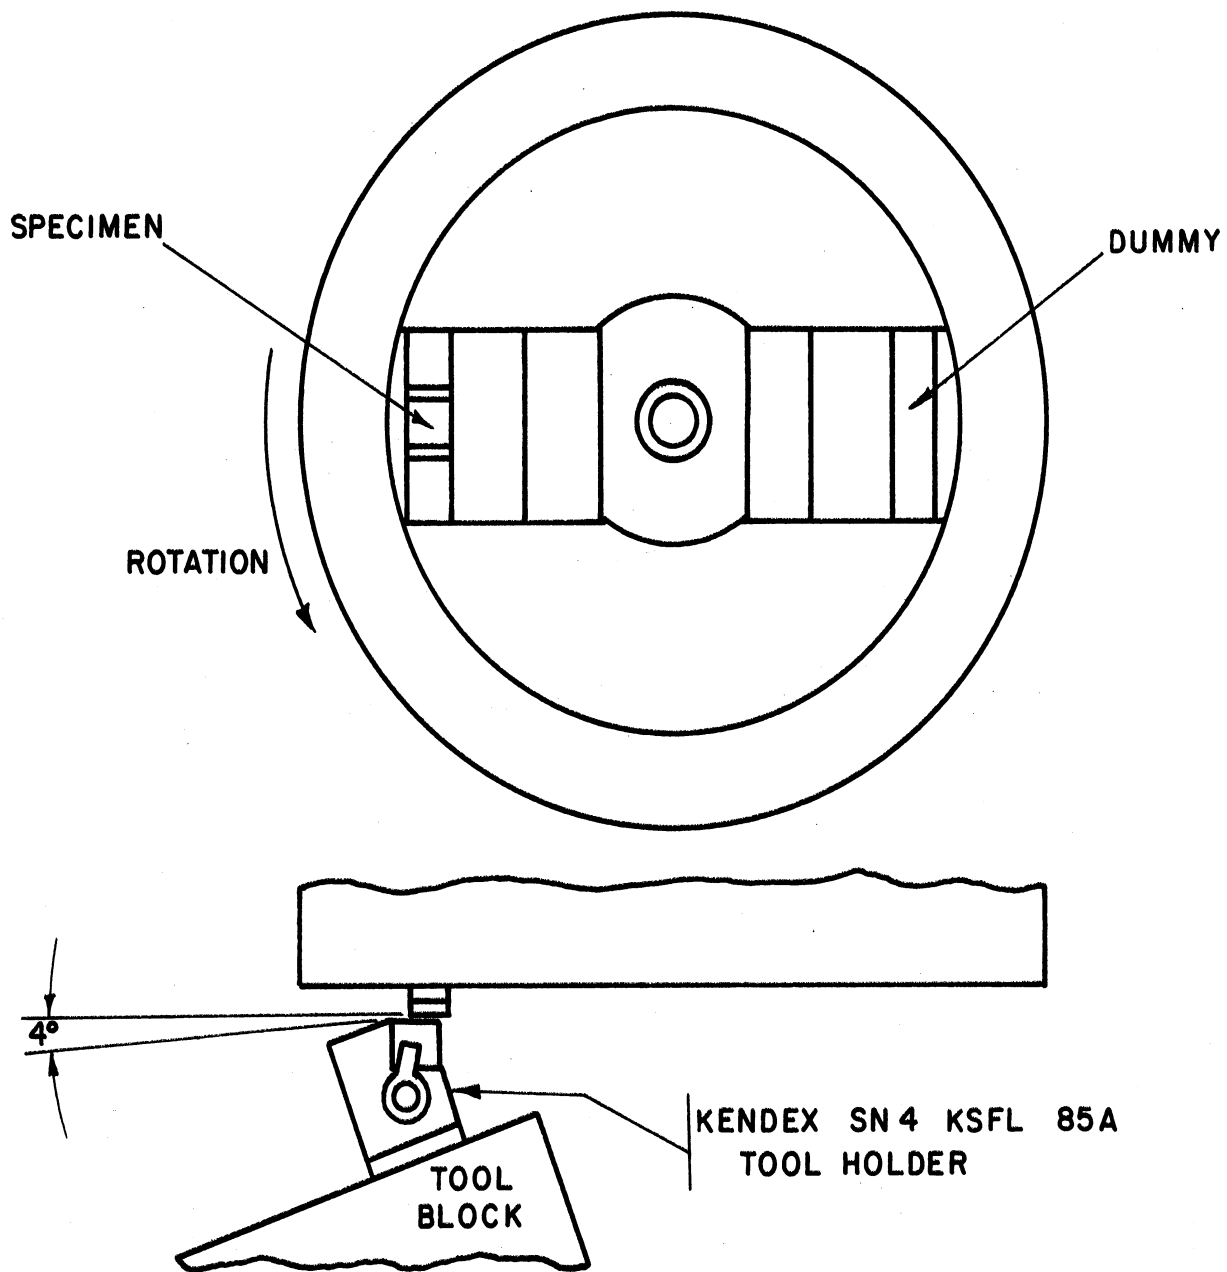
Rotating specimen with 4° offset of cutting tool.
